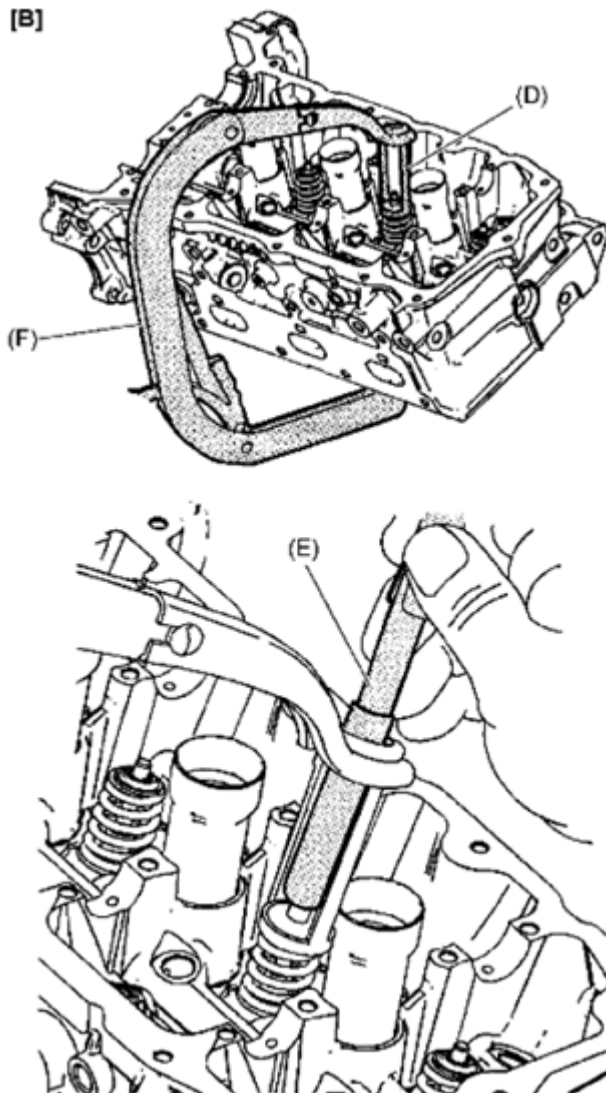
Compressing Valve Spring And Valve Couters Into Groove In Valve Stem
